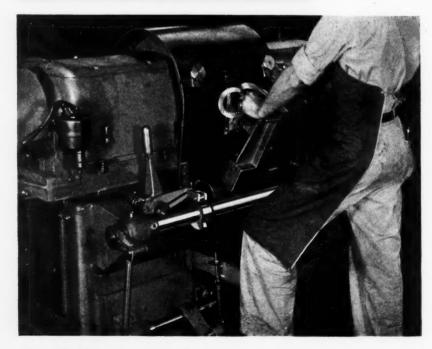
A Rotary Fixture which Holds Roller-bearing Rolls in Hardened and Ground Liner Bushings for Grinding Both Ends
